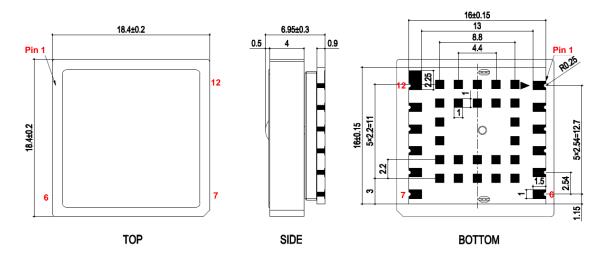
Top, Side and Bottom View Dimensions for LC86G (AA, AB)
